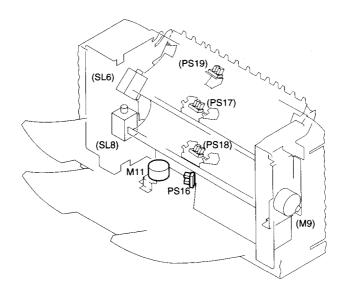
Electrical Parts Involved in Shifting the Trays
